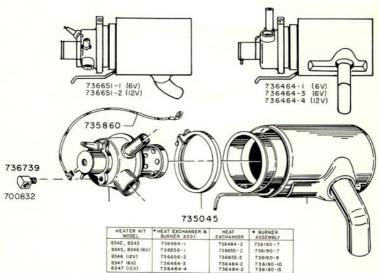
FIGURE - HEAT EXCHANGER & BURNER ASSEMBLY USED ON KIT MODELS
